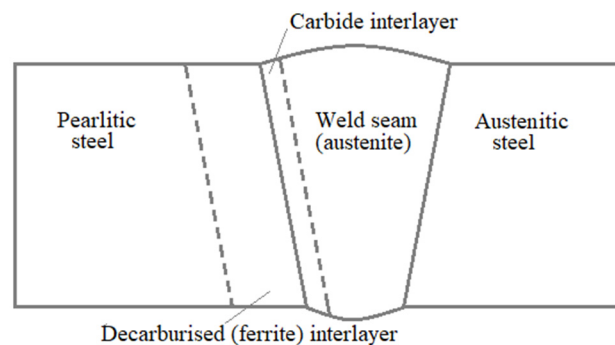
Scheme of a welded joint of pearlitic and austenitic steels.
